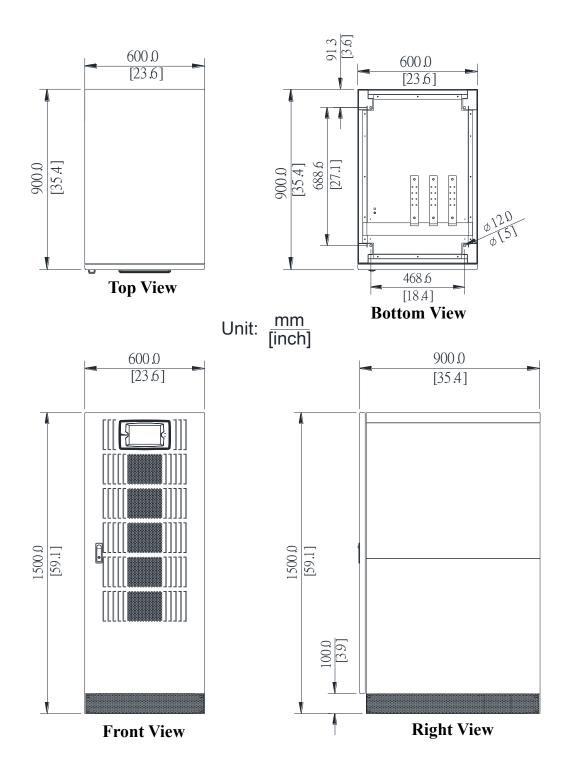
Dimensions of the 3P3W 1500mm Height Cabinet
